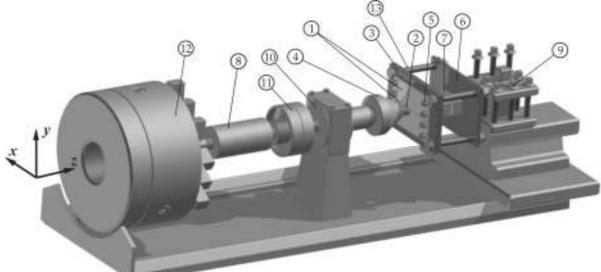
Measuring configuration for torque and axial force: 1-workpiece, 2-welding tool, 3-anvil, 4-welding tool's spindle, 5-bolts, 6-backing plate, 7-force sensor, 8-torque sensor, 9-machines tool rest, 10-axial bearing, 11-clutch, 12-machine's spindle, 13-fundamental bolts
